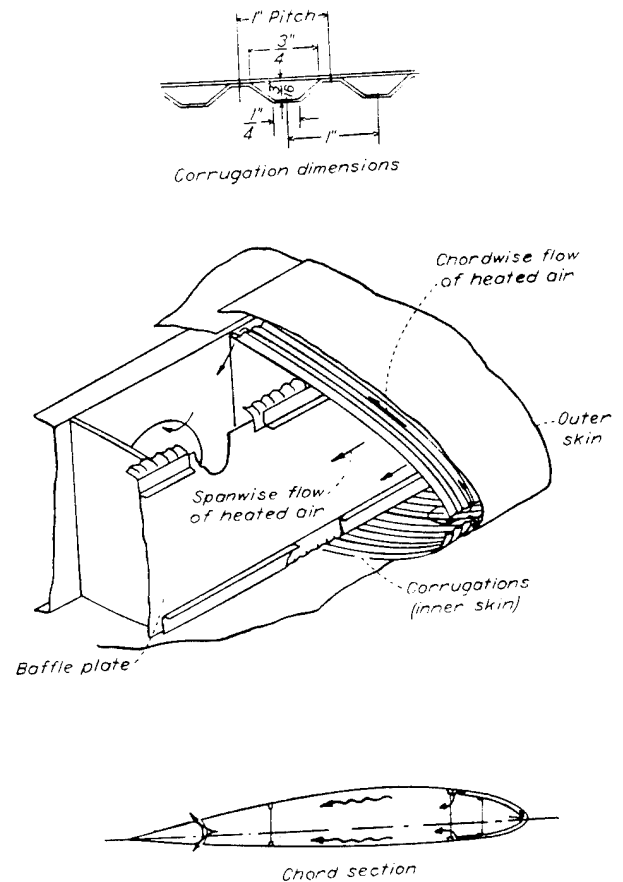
Structural details of a typical wing or empennage thermal ice-prevention system employing heated air.
